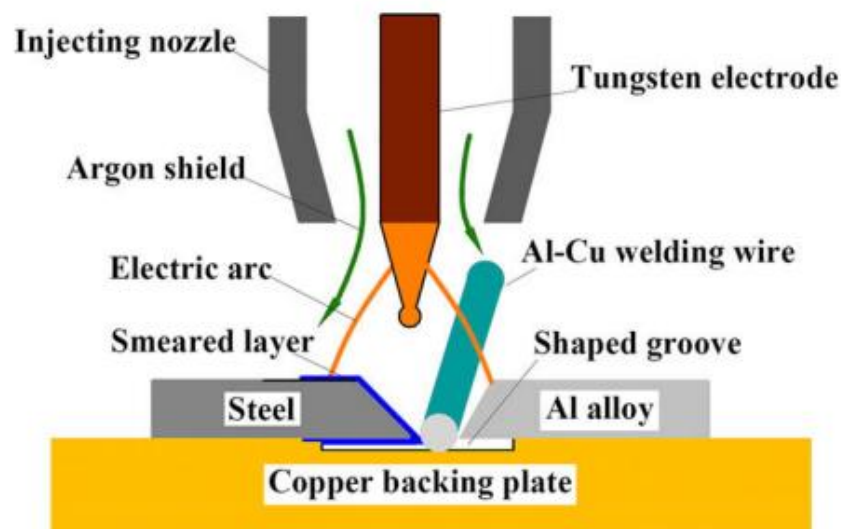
Schematic of aluminium-steel butt TIG welding
